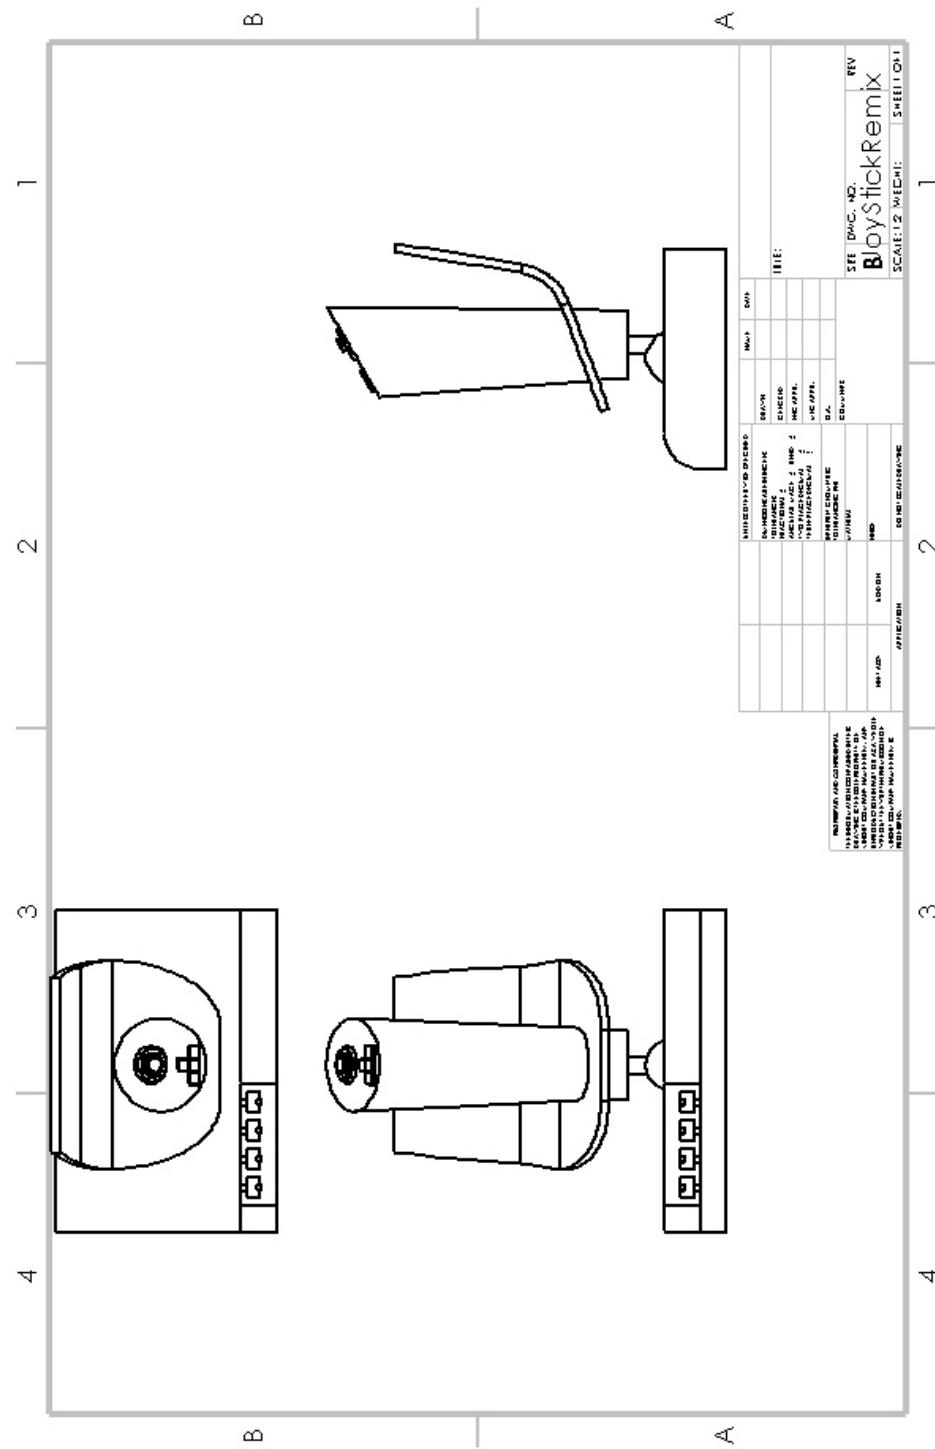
Kumar, Vishakh: JoyStick Full Assembly
